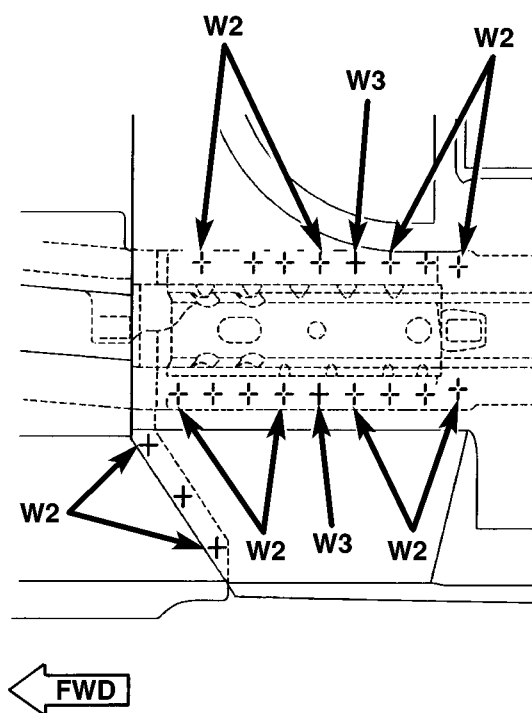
FRONT SEAT CROSS MEMBER - SHORT WHEELBASE, ALL WHEEL DRIVE ONLY
